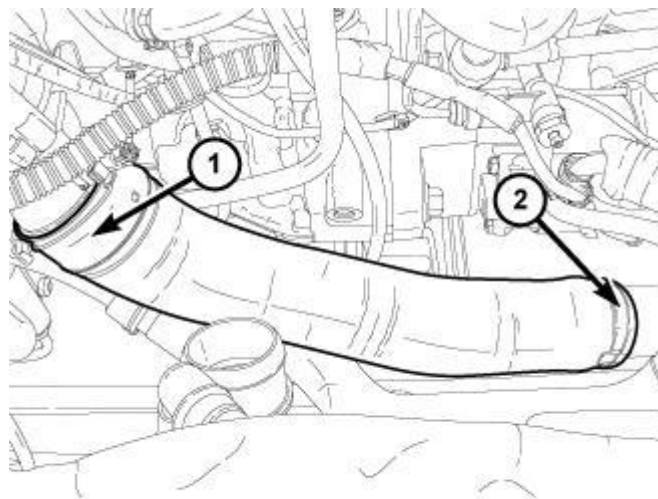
EGR Tube Gasket Onto EGR Actuator
